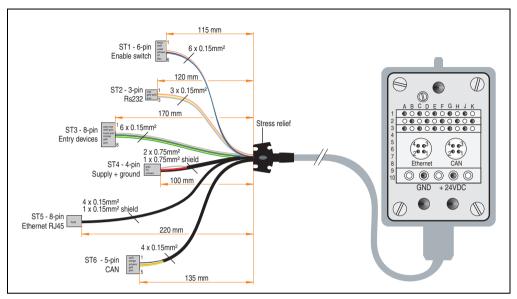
Cable specifications - Attachment cable 5CAMPH.0xxx-00
